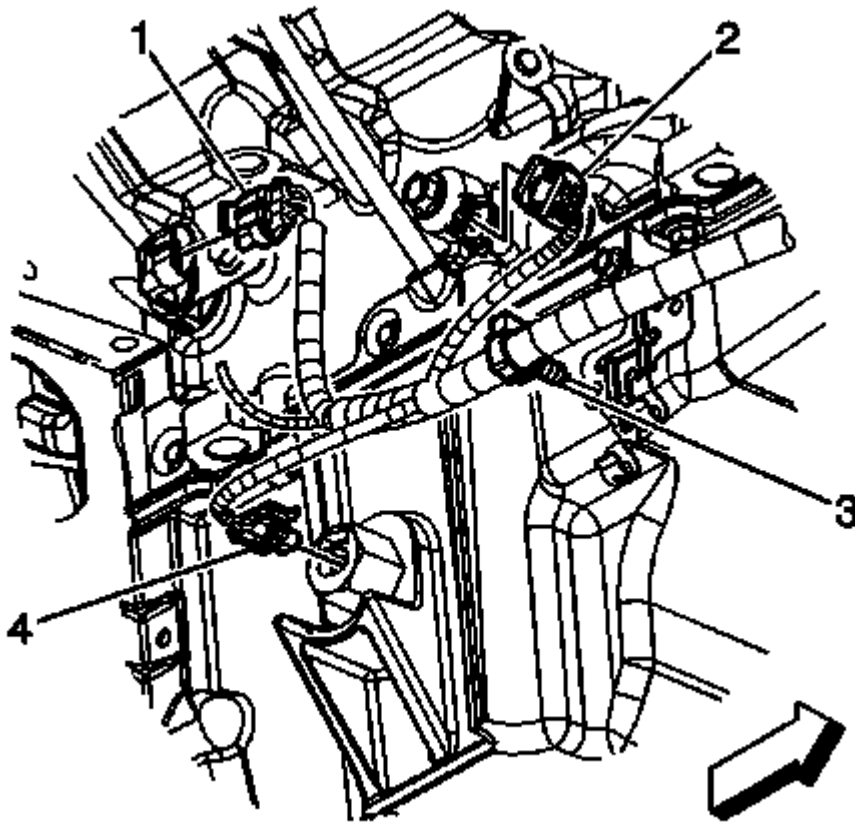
View Of Power Steering Pump-To-Engine Block Bolt
